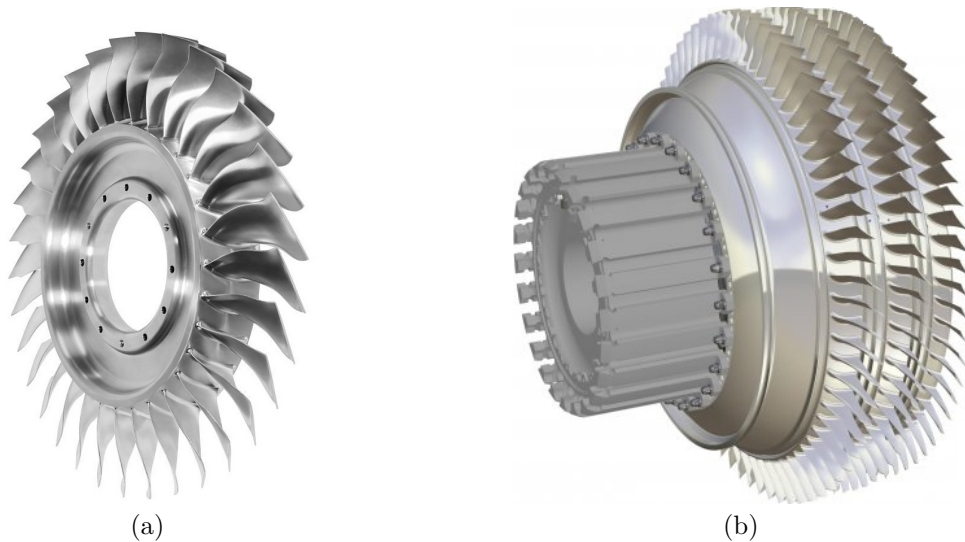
Single-piece technology. (a) Bladed disc [84]. (b) Bladed drum [Safran].
